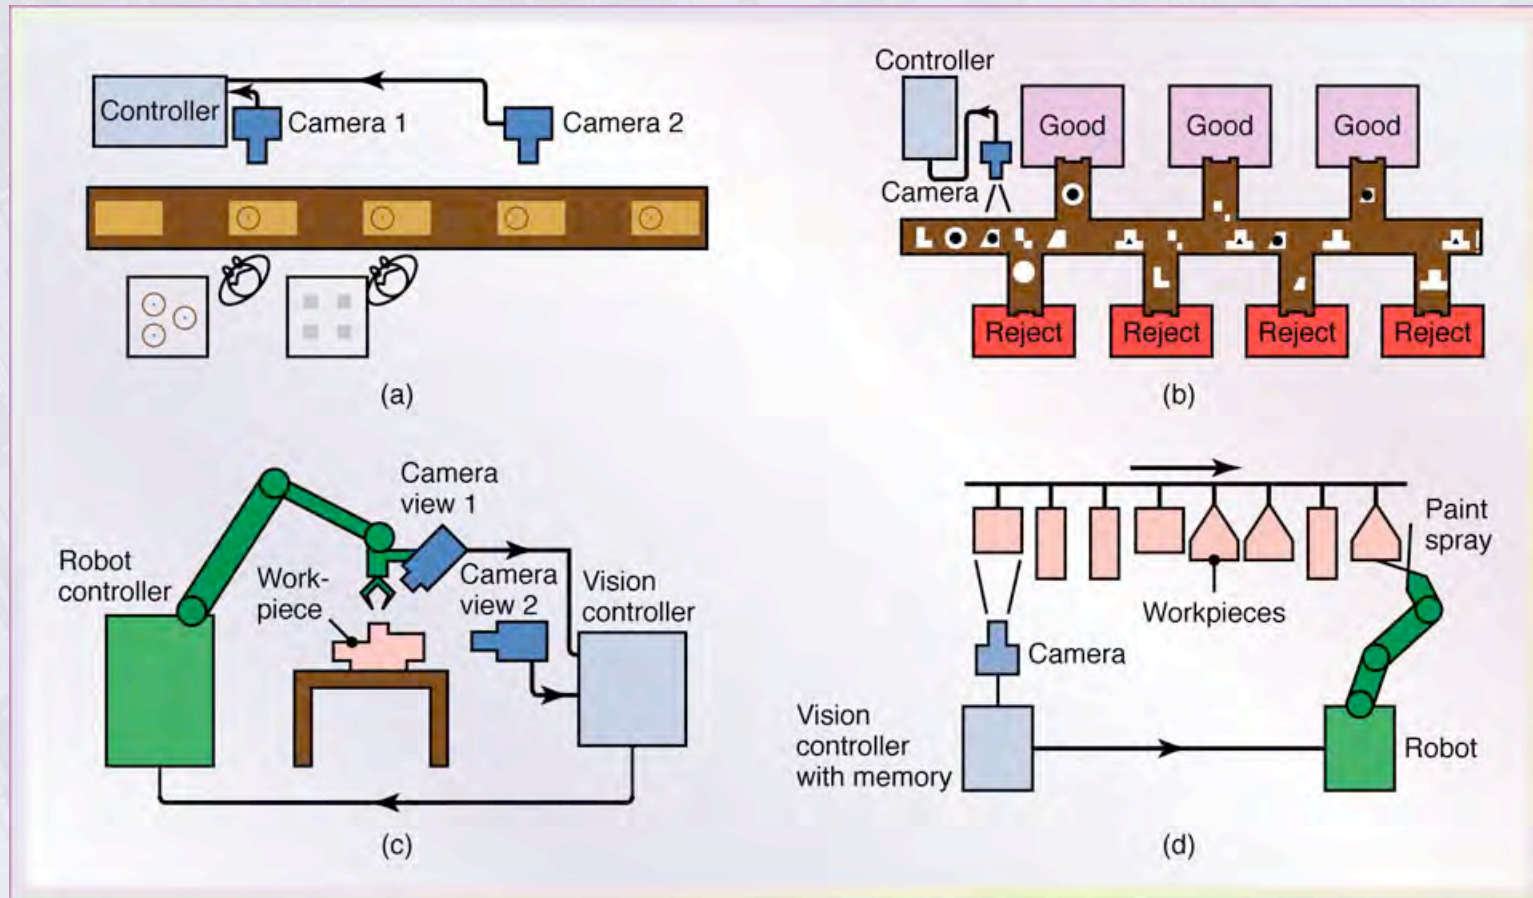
Examples of machine-vision applications. (a) In-line inspection of parts. (b) Identification of parts with various shapes and inspection and rejection of defective parts. (c) Use of camera to provide positional input to a robot relative to the workpiece. (d) Painting parts having different shapes by means of input from a camera. The system's memory allows the robot to identify the particular shape to be painted and to proceed with the correct movements of a paint spray attached to the end effector.
